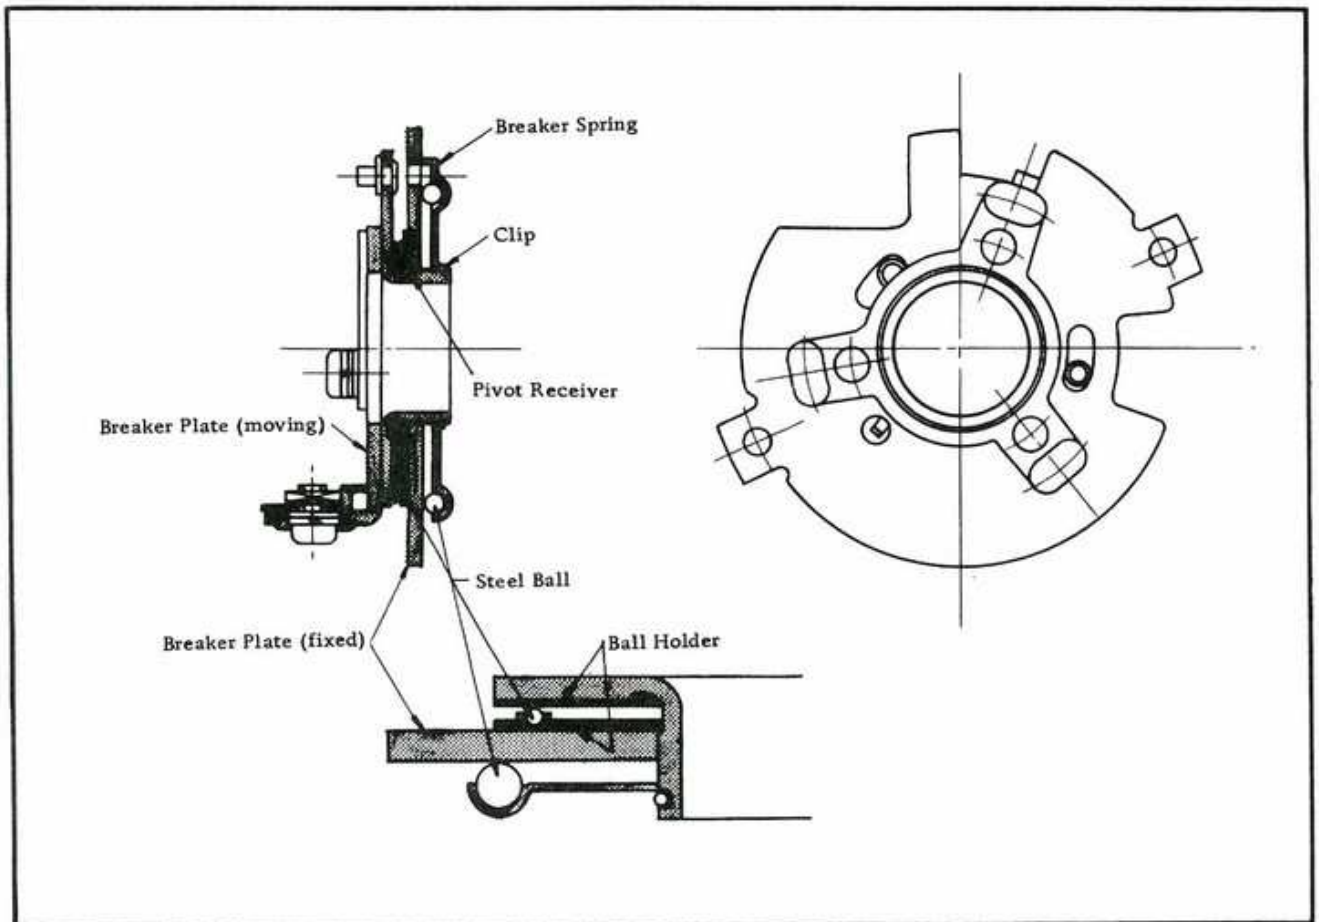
Breaker Plate Collecting Part Mechanism
